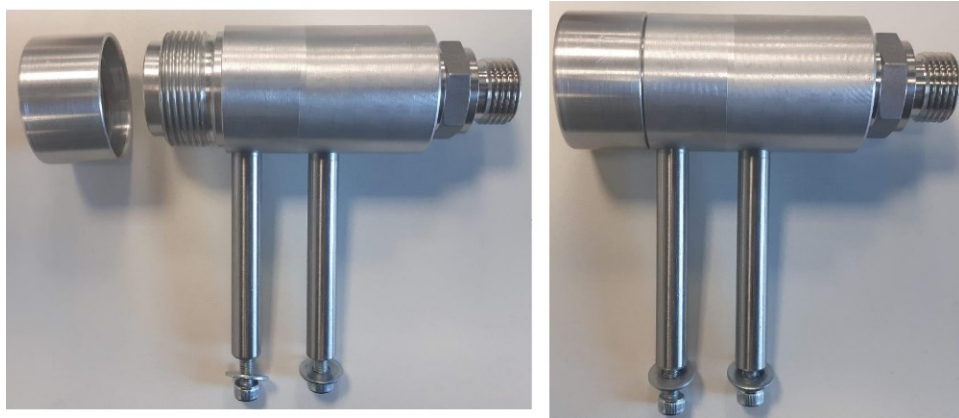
Side view of Mode I test sample holder with fitting for pressurized system connection.
